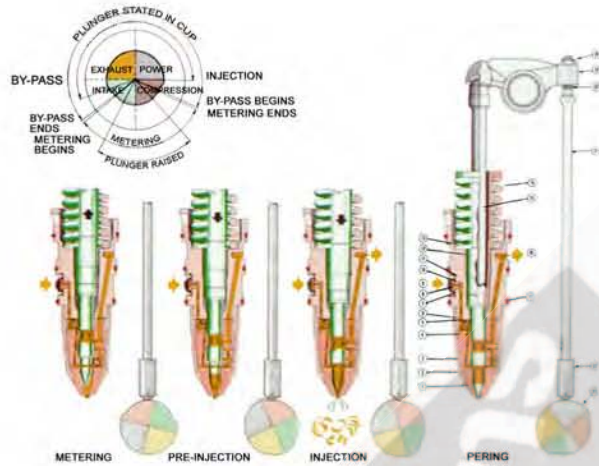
(FWC-28). Fuel injection cycle - PT (Type D) injector
